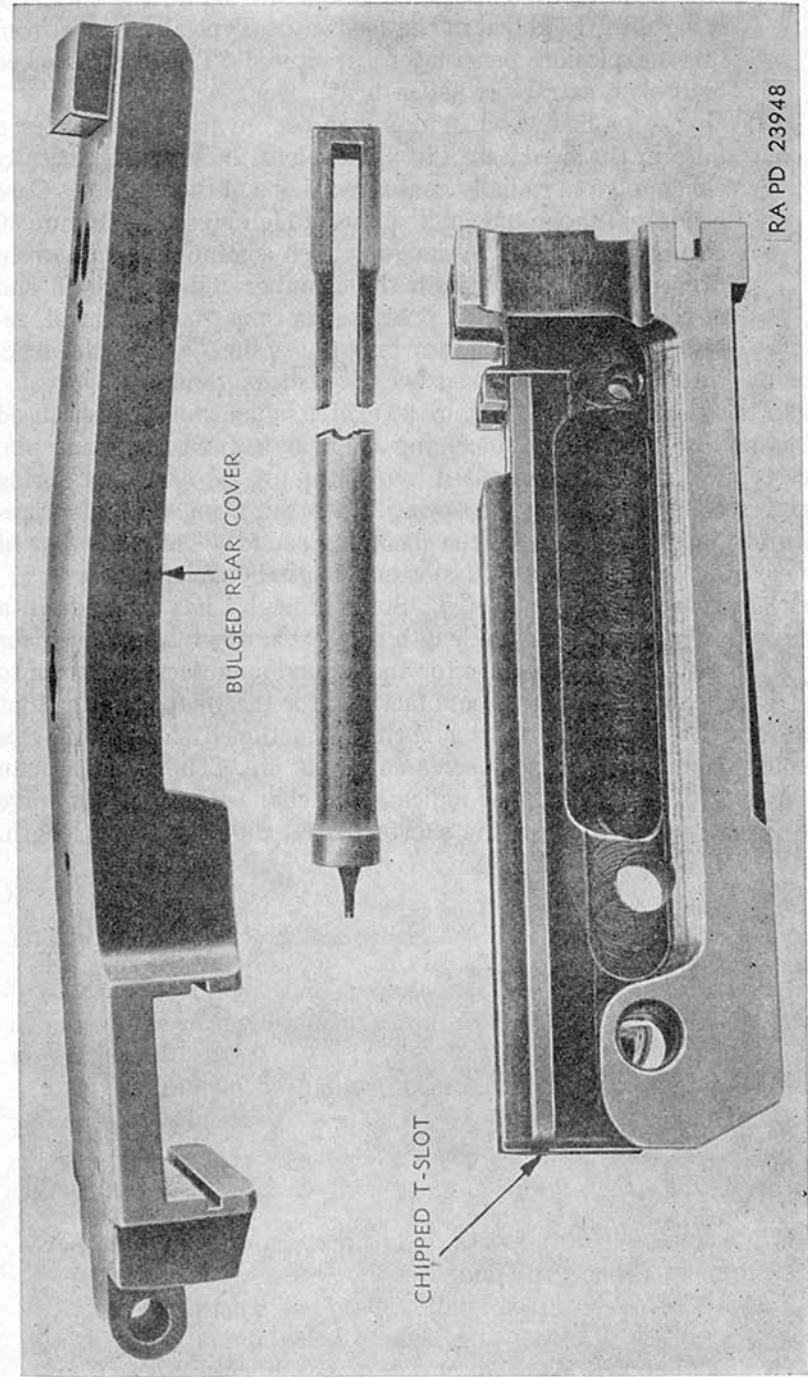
Damage from fractured firing pin causing premature ignition, cal. .30 machine gun.
